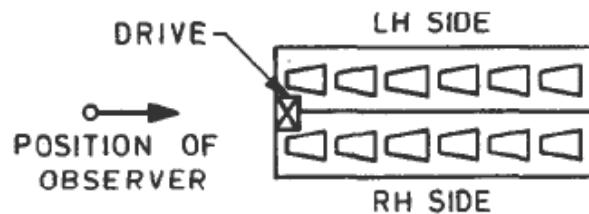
SIDE OF DOUBLE-SIDED MACHINE WITH LATERAL DRIVE
